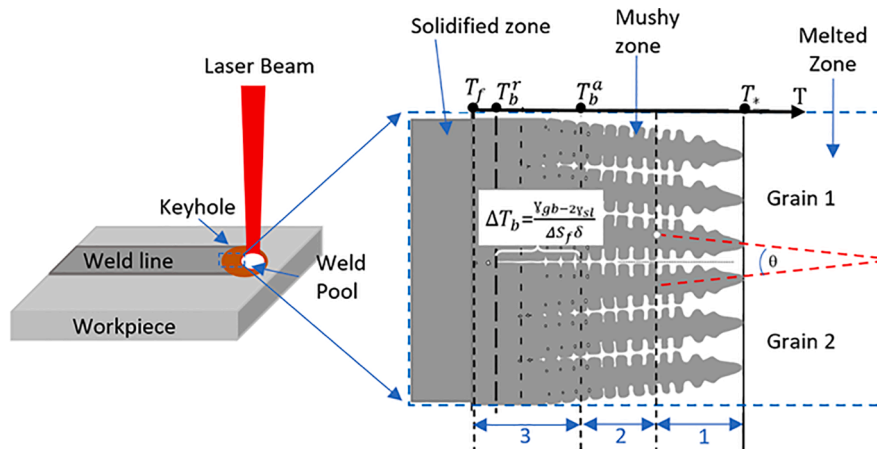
Laser beam welding on the workpiece (left), solidified, mushy and melted zones (right) (Wang et al., 2004).
